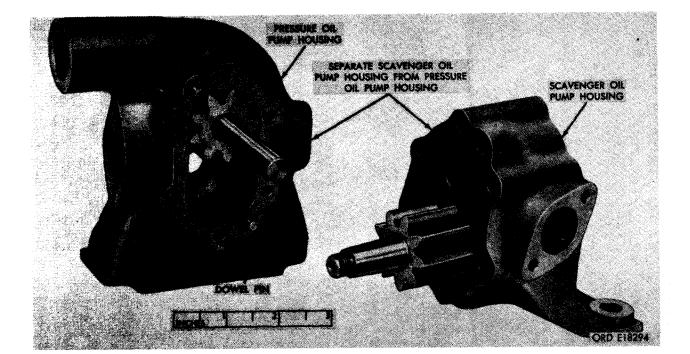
SEPARATING OR ASSEMBLING SCAVENGER OIL PUMP HOUSING AND PRESSURE OIL PUMP HOUSING.
